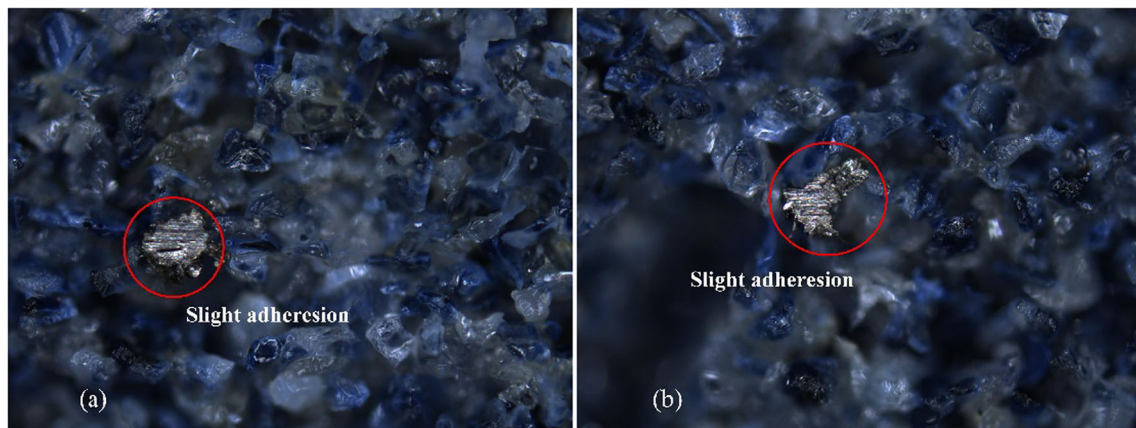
Surface morphology of abrasive wheel after grinding a FG96 and b GH4169 superalloy materials
